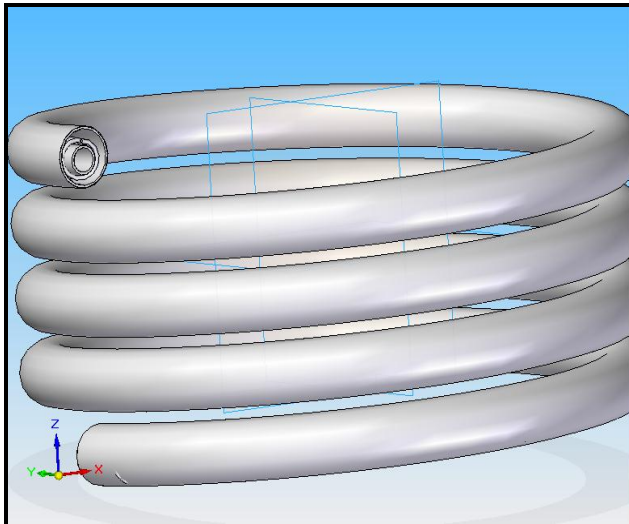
Solid Edge Model of Tube-In-Tube Helical Coil Heat Exchanger
